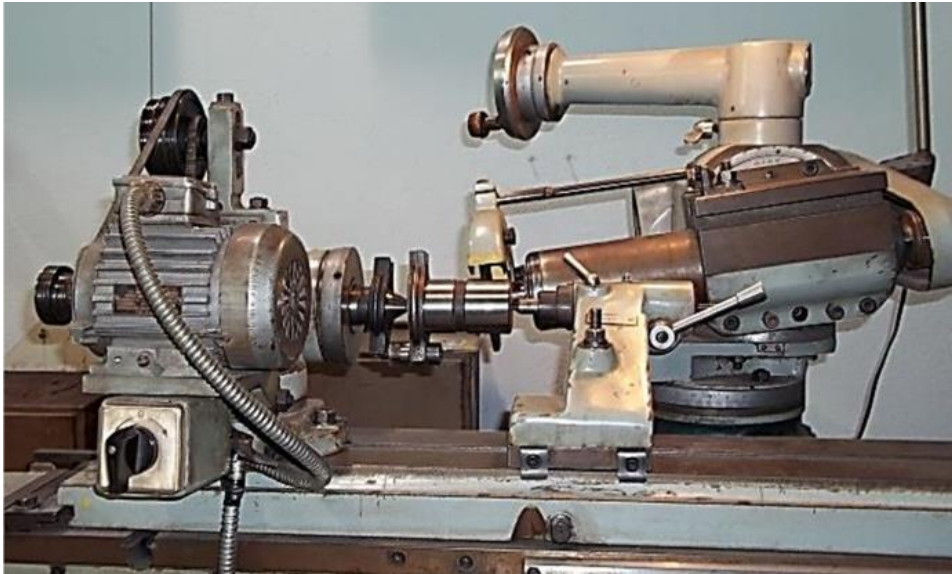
Test bench for external circumferential grinding, using the Quickpoint technique
